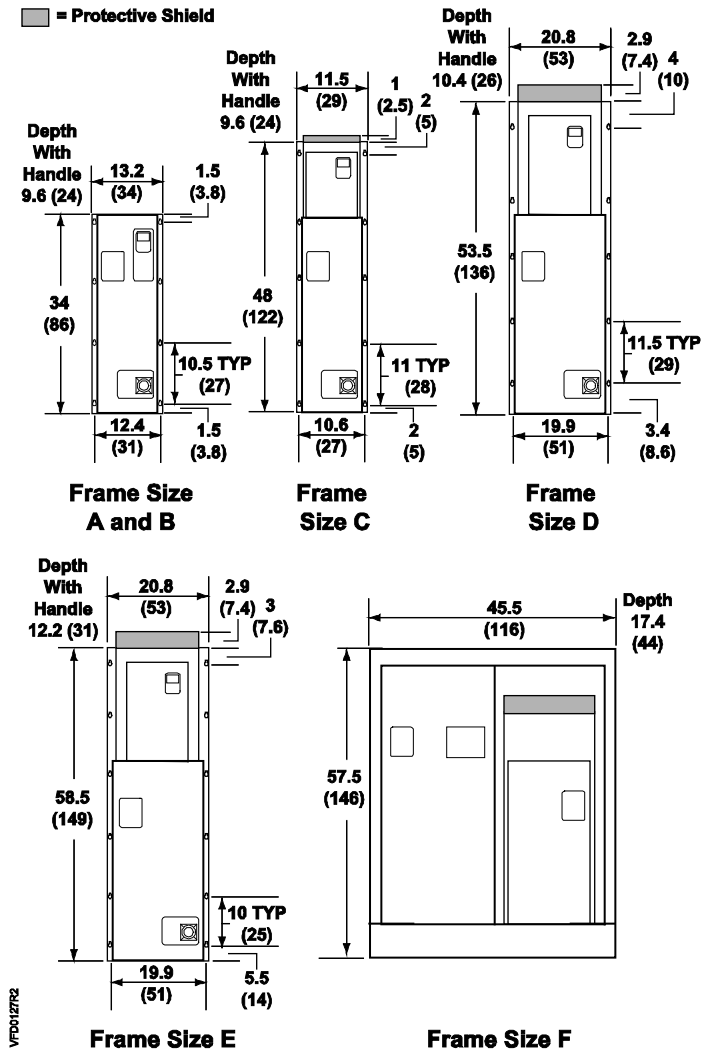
E-Bypass Overall and Mounting Dimensions in Inches (Centimeters).
